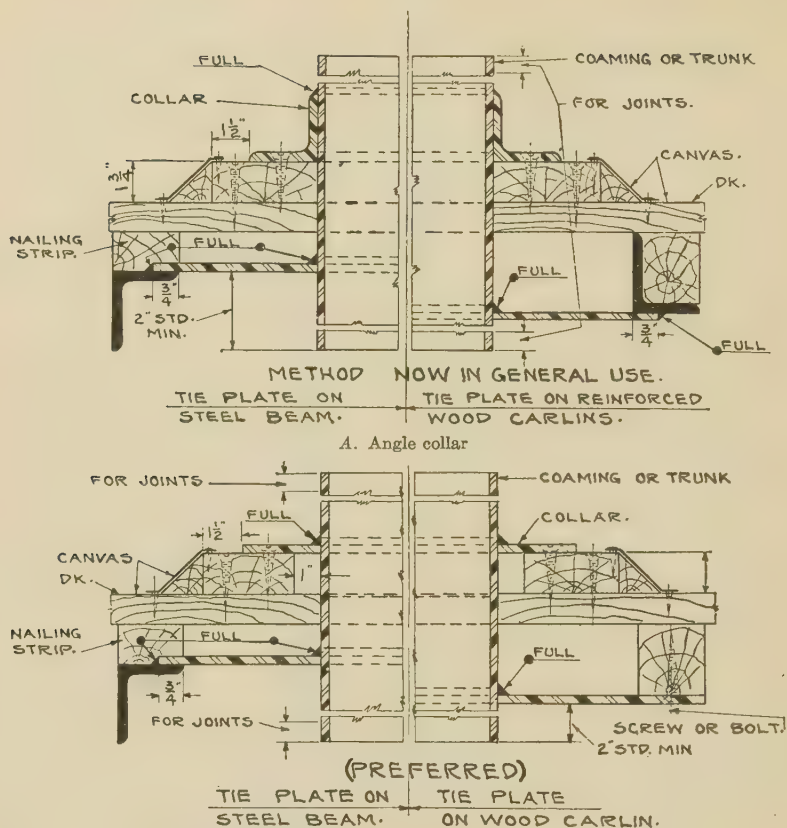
Welded vent coaming and trunk attachments for joiner deck.
